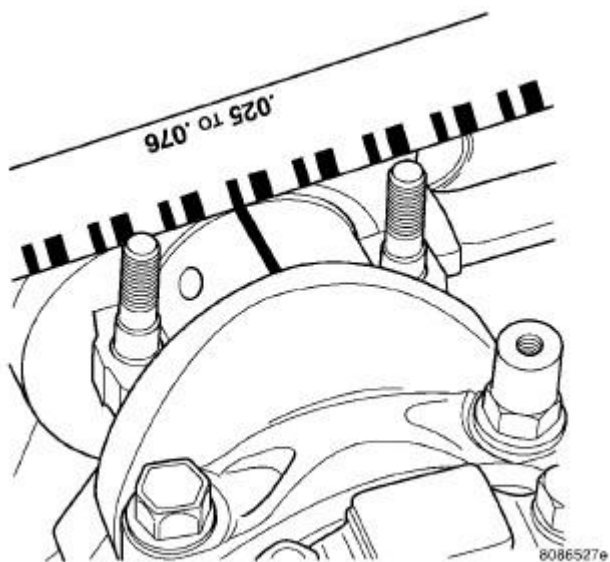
Checking Connecting Rod Bearing Clearance-Typical
